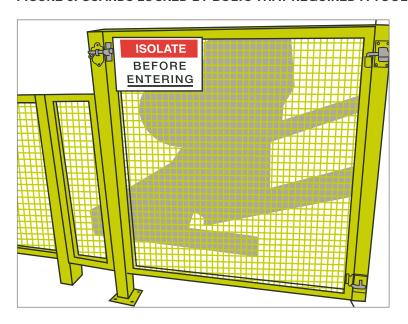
GUARDS LOCKED BY BOLTS THAT REQUIRED A TOOL TO OPEN
